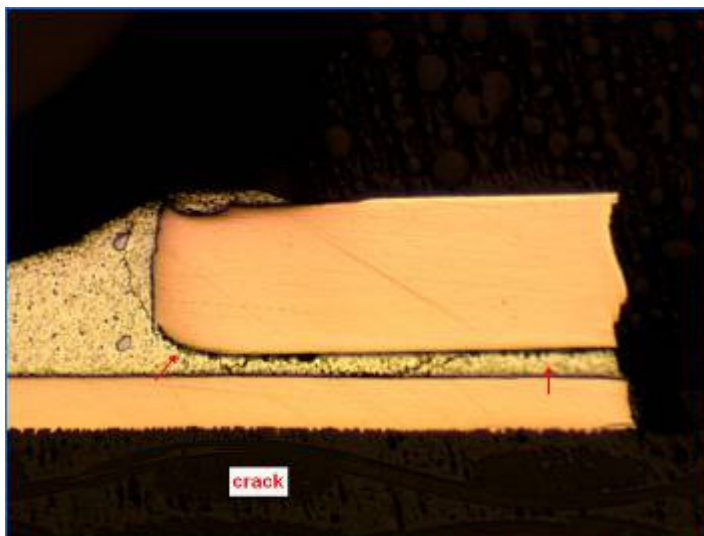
cross section, SN61, U28, left lead solder crack, 100x
